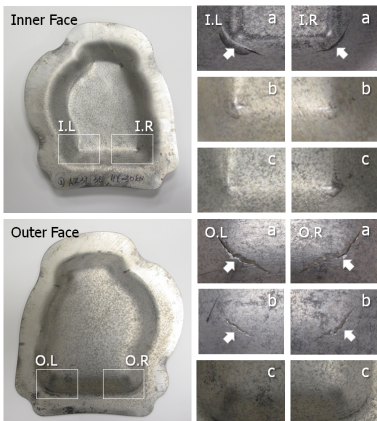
Deep drawing test results for various punch strokes; a)17.6mm, b)22.6mm, c)24.6mm
